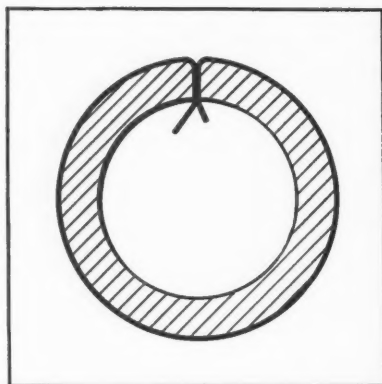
Cross-section of Tubing with a Heavy Wall of Ordinary Steel, Covered by a Thin Layer of Stainless Steel
